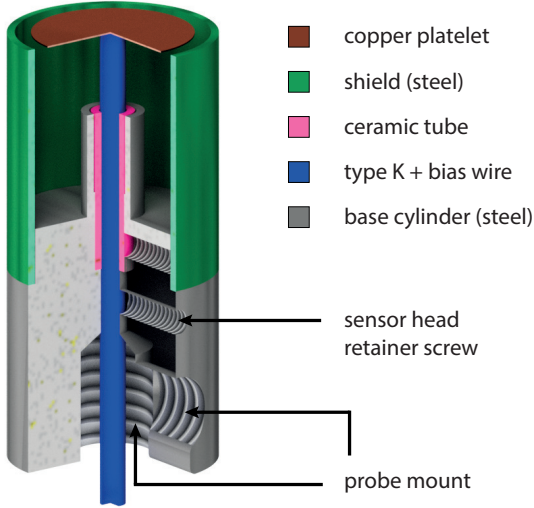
Schematic drawing of the PTP sensor head. The Type K thermocouple and the wire for biasing are spot-welded to the back of the copper platelet that represents the substrate. The whole sensor is housed in a stainless steel cylinder to shield it from any surrounding influences other than the ones coming from the upper half-space.
